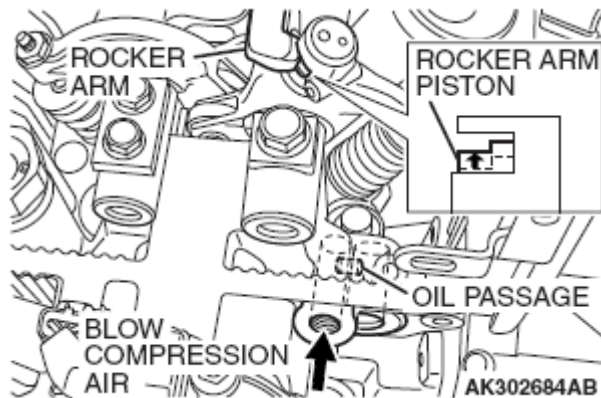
Blowing Compressed Air Into Engine Oil Pressure Switch's Installation Hole
